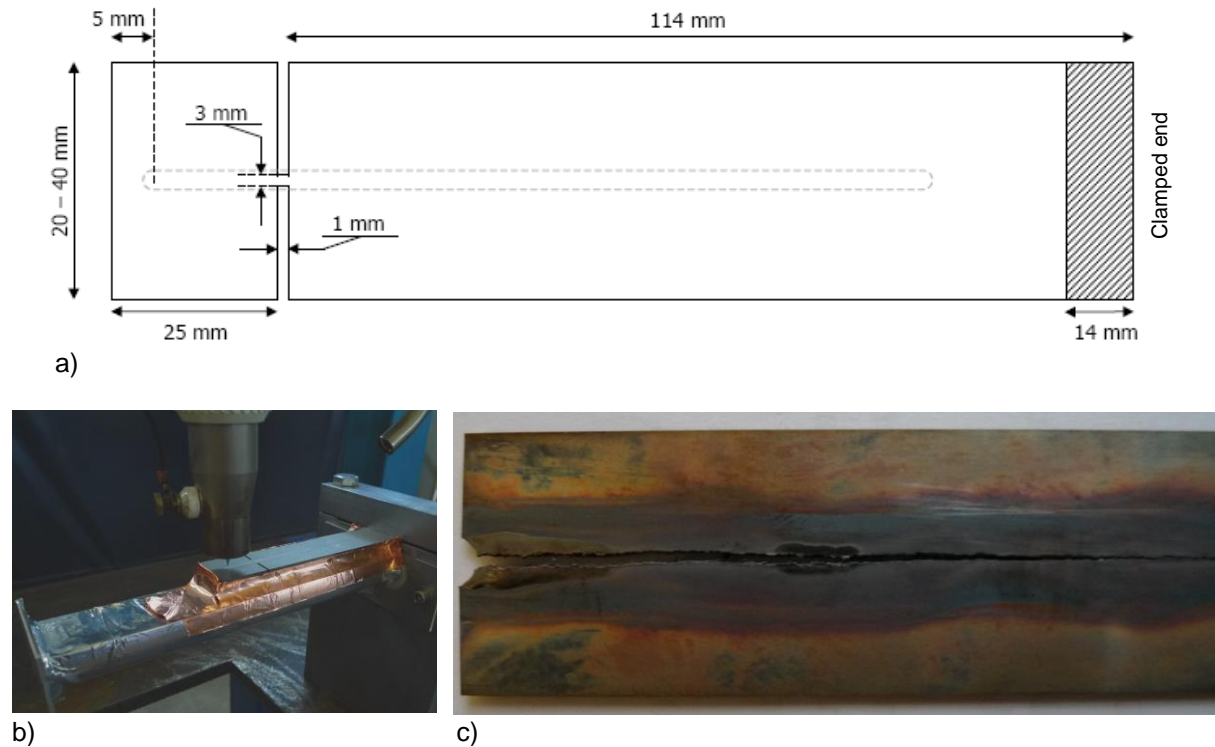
Hot cracking test: a) geometry of plate specimens ; b) experimental set-up showing clamping and protection against oxidation on the lower side of the plate ; c) example of a crack fully developed throughout the weld bead (test 4 of Table 2).
